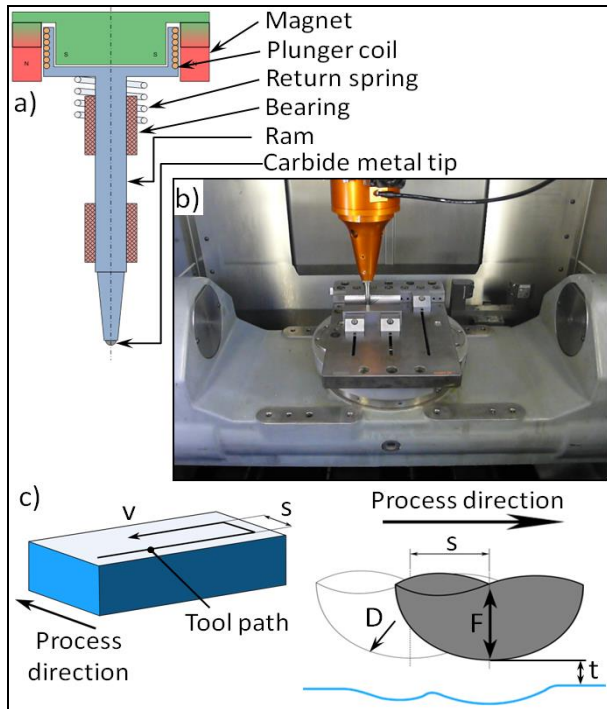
Technology of machine hammer peening: a) Design of the electro-magnetic actuator, b) Experimental set up at a Hermle 5-axis machining center, c) Illustration of important process parameters (described in Tab. 1).
